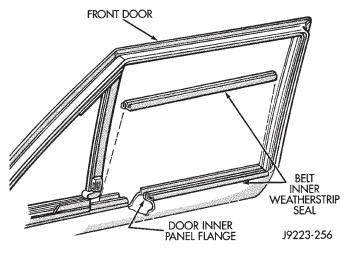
Front Door Belt Inner Weatherstrip Seal DOOR OPENING WEATHERSTRIP SEAL INSTALLATION
